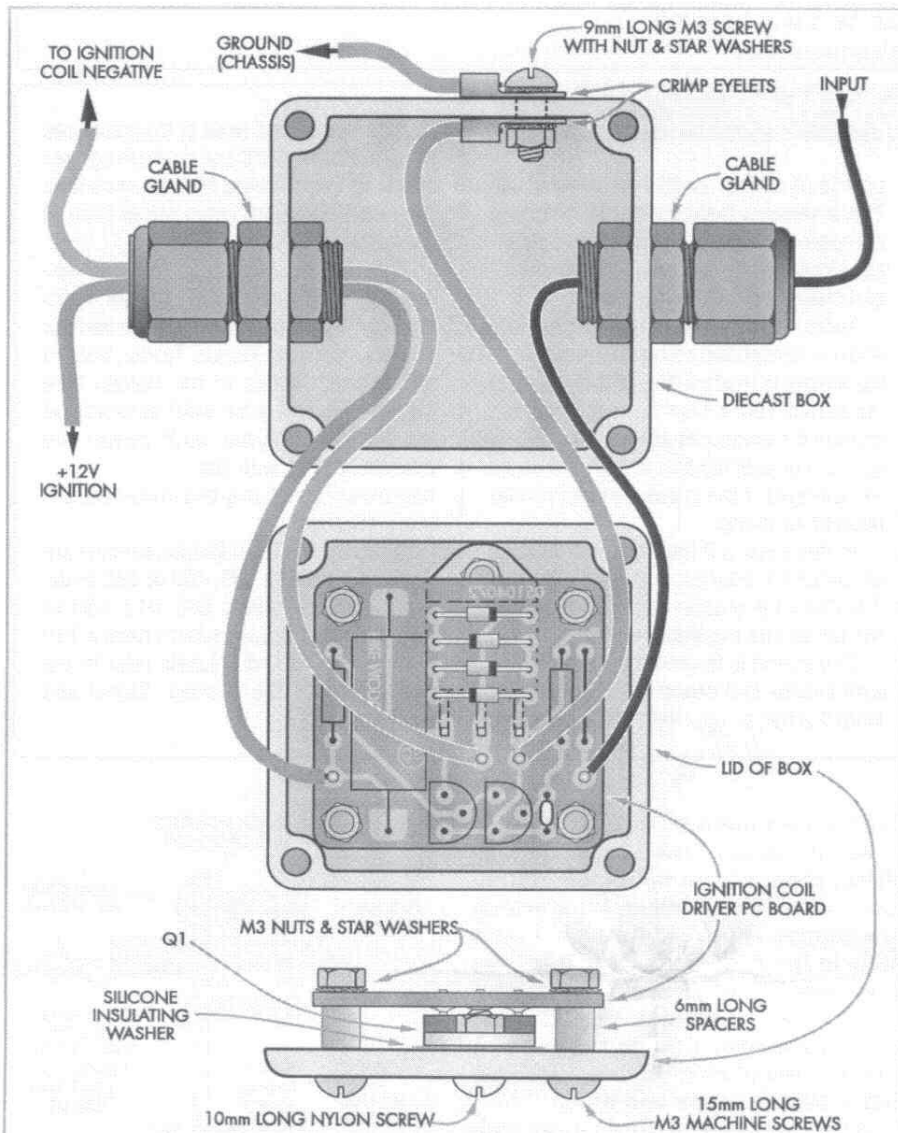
final assembly and external wiring details for the Ignition Coil Driver. After assembly, use a multimeter (set to a low ohms range) to confirm that the metal tab of Darlington transistor Q1 is properly isolated – ie, it must not be shorted to the case.
